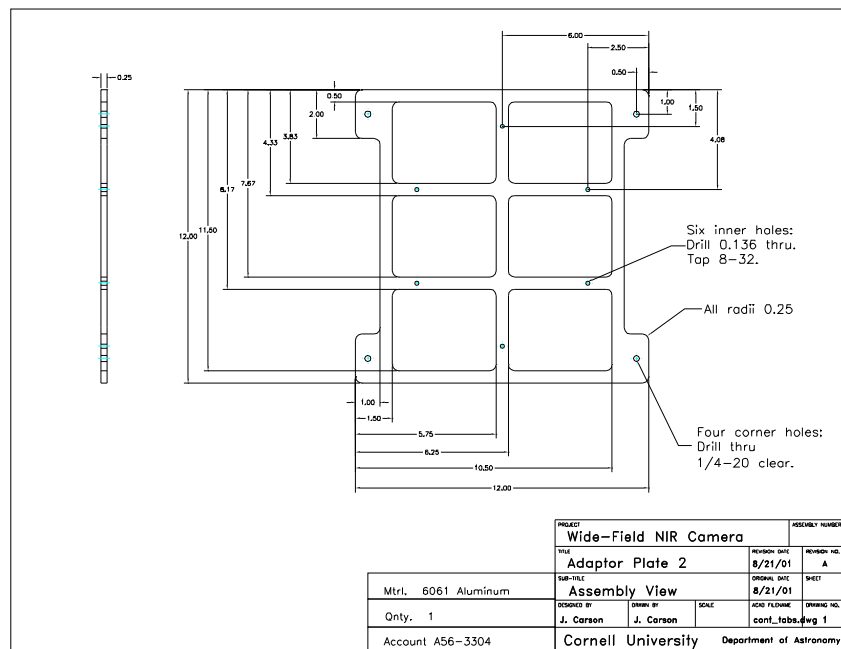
Motor Controller Box Adaptor Plate. This piece provides the interface between the Motor Controller Box Support Rack and the Motor Controller Box Supports.
